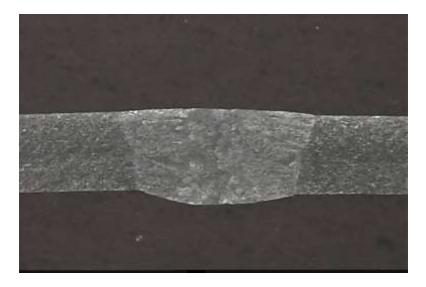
The fusion zone and heat affected zone of a 5754 aluminum laser weld.
